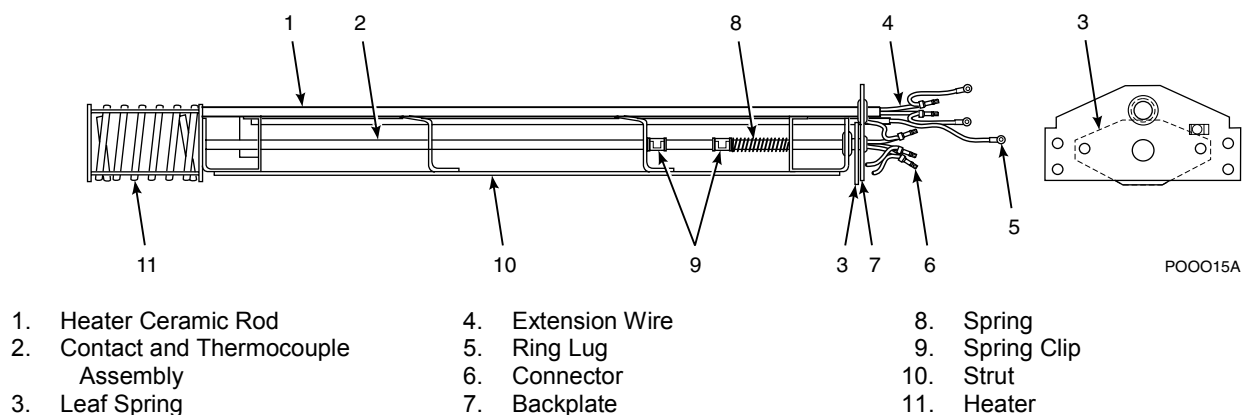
Heater, Strut, and Backplate Assembly (Inner Probe Assembly)
